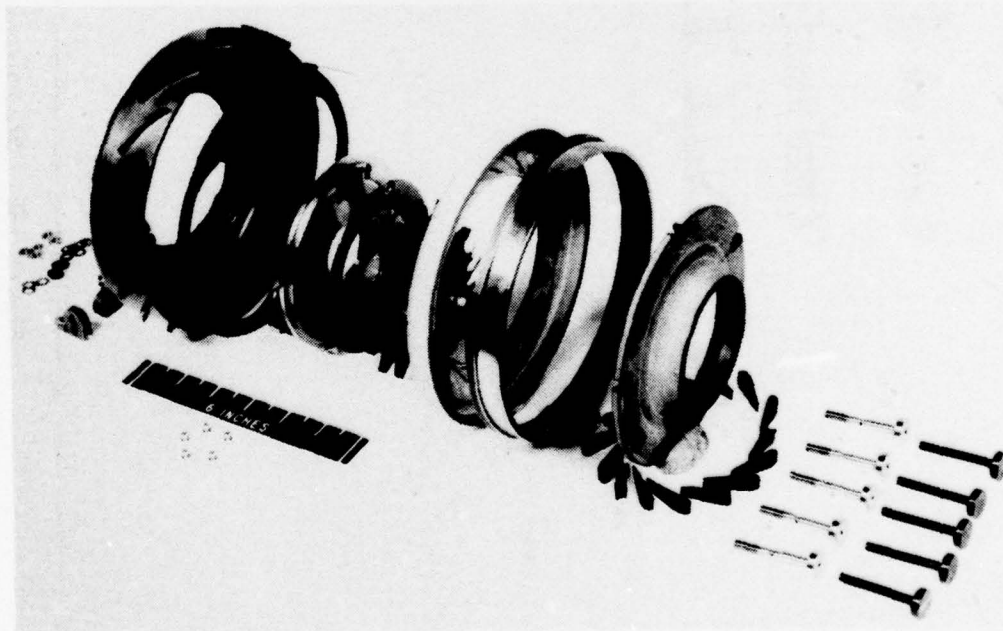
Exploded View of All-Ceramic Nozzle Components With Si_3N_4 Shrouds, Vanes and Bolts
